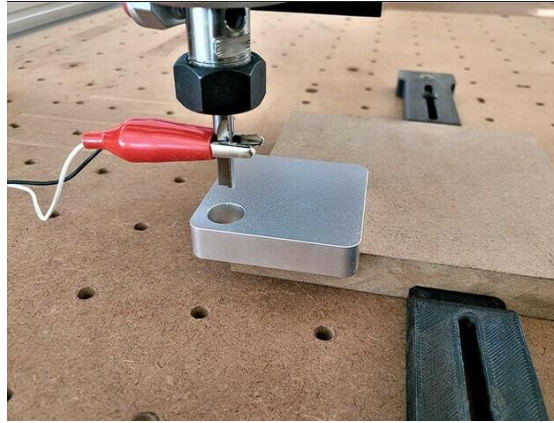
CNC touch probe to define the work coordinates, using an alligator clip to close the circuit between the probe body and the endmill (3DPrintrionics, n.d.)
